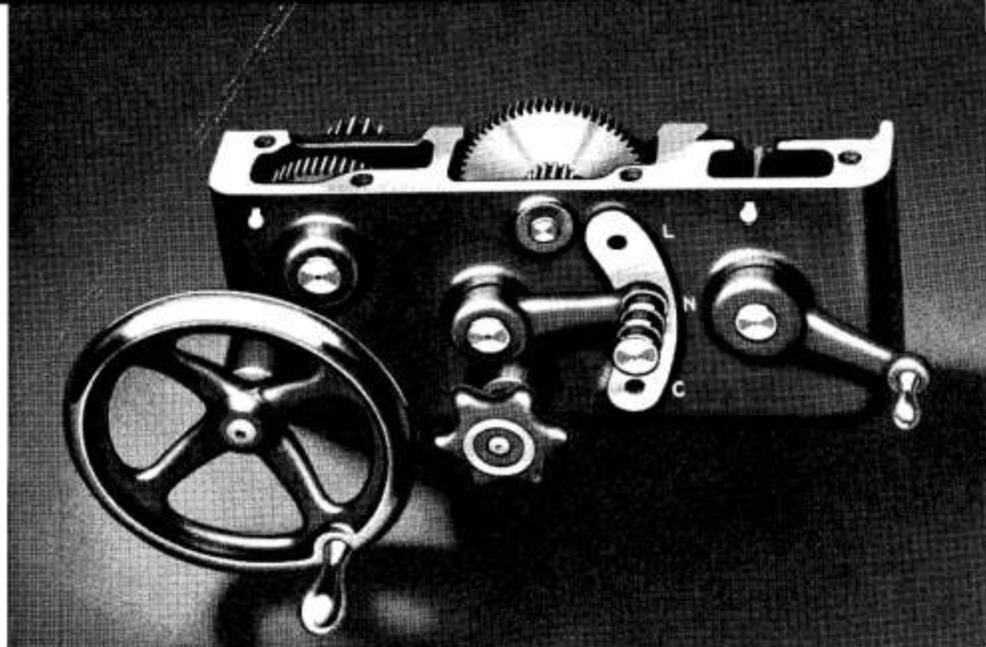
Front View of Double Wall Apron Showing Rigid Box Type Construction
